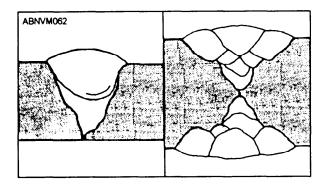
Gross section of two welds showing poor root fusion and too heavy a root face.
